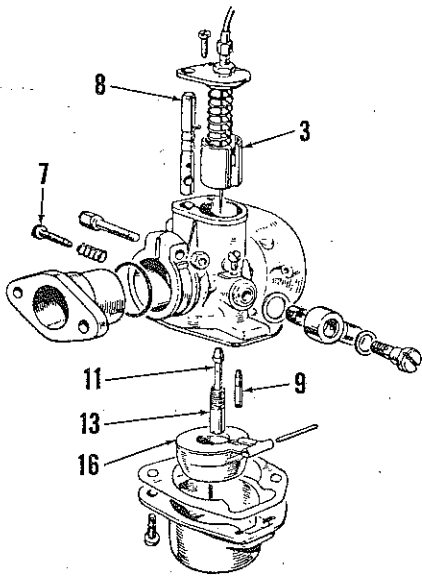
Exploded view of Zenith carburetor used on some models.
